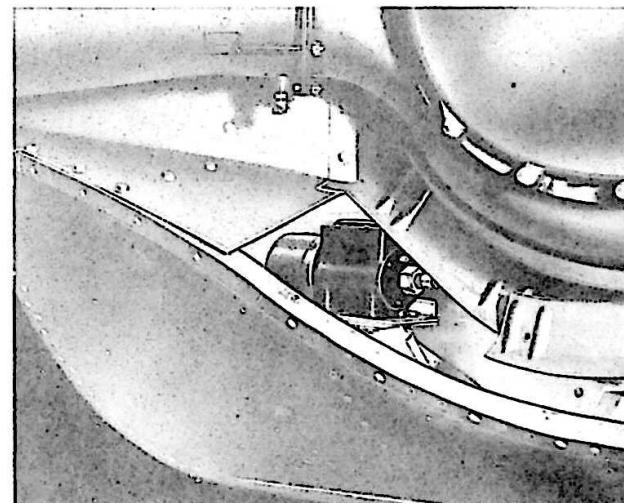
Governor Mounting, Inboard Engines of B-29 Airplanes
